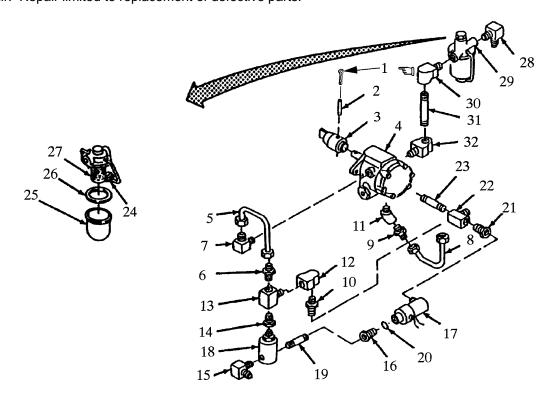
Fuel Pump and Solenoid Valve Assembly/Disassembly (Sheet 1 of 2)
